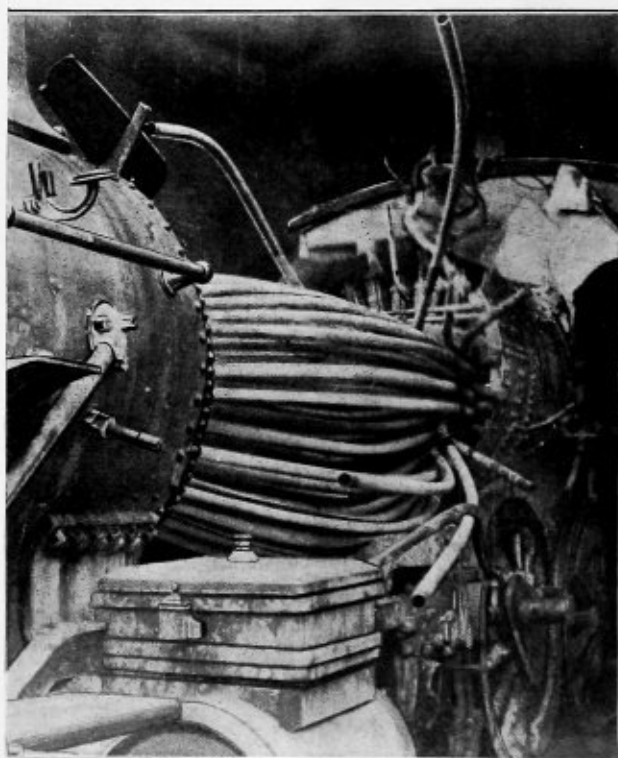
EXPLOSION CAUSED BY DEFECTIVE BARREL
